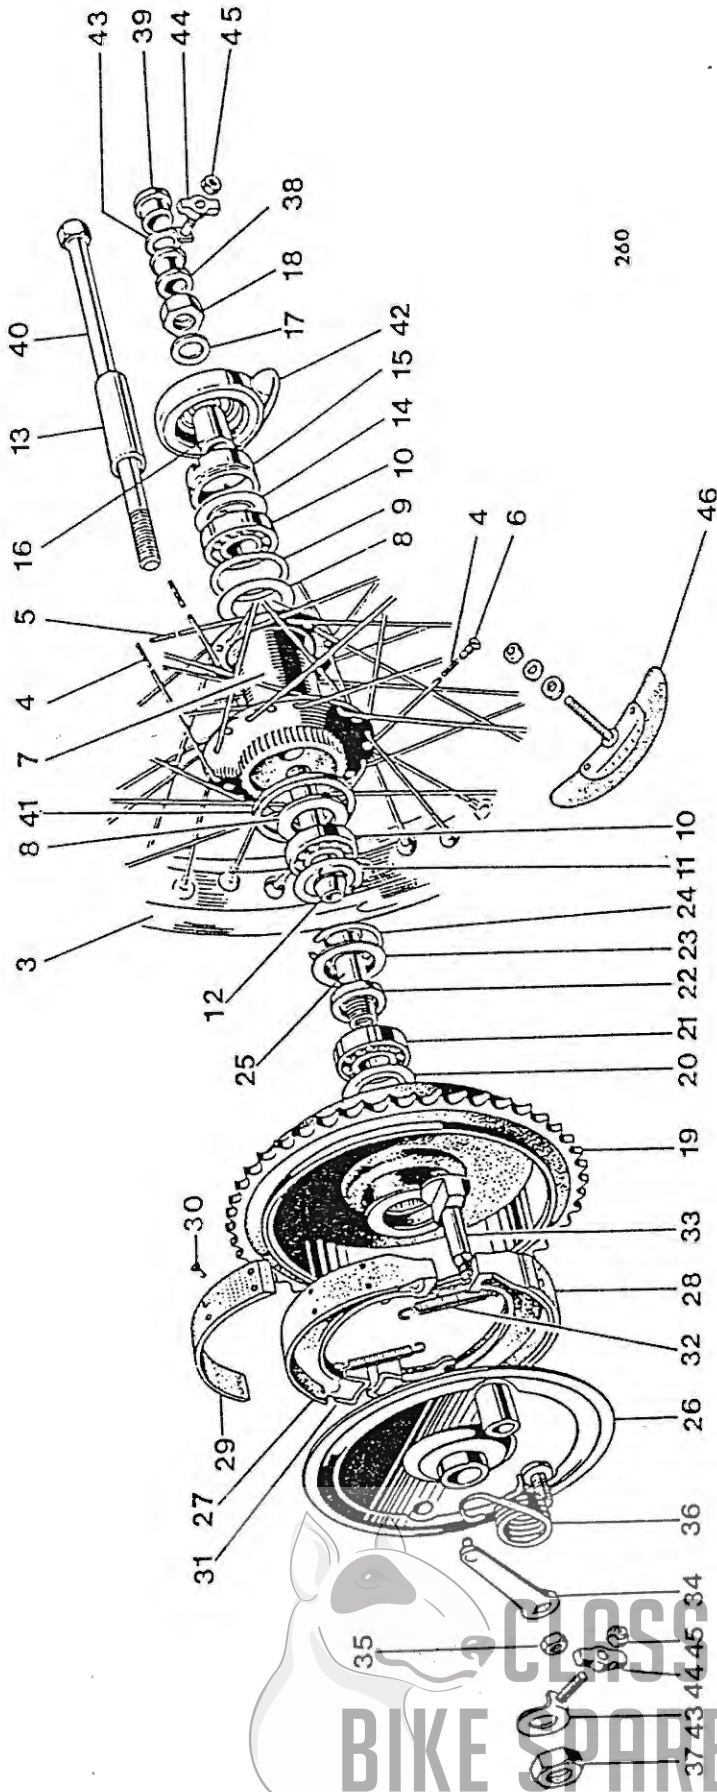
QUICKLY DETACHABLE REAR WHEEL (NOT U.S.A.)
